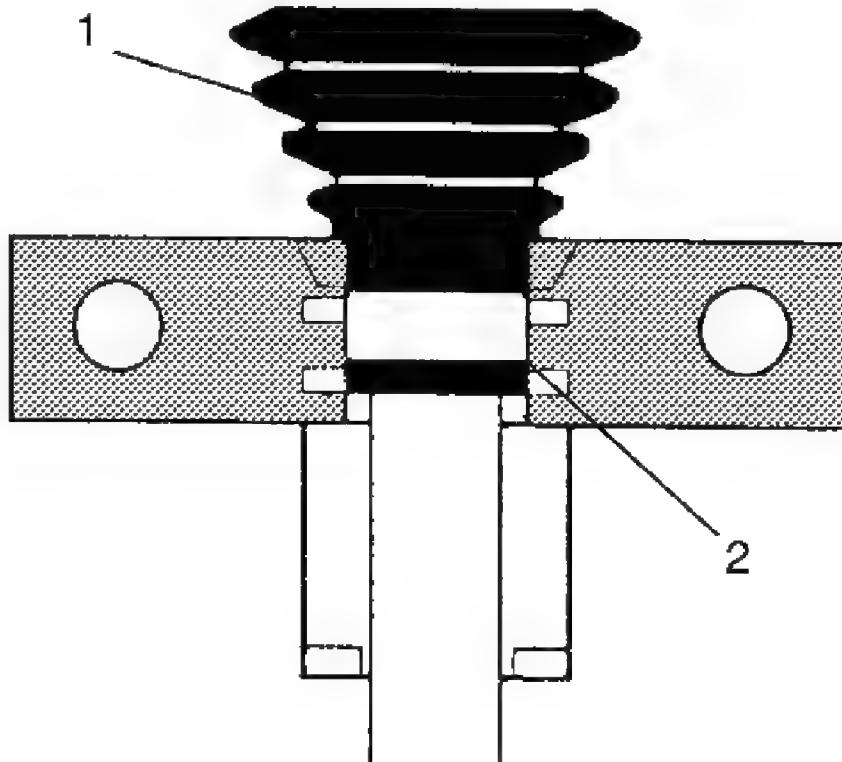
Identifying Halfshaft Inboard Seal & Swage Ring
